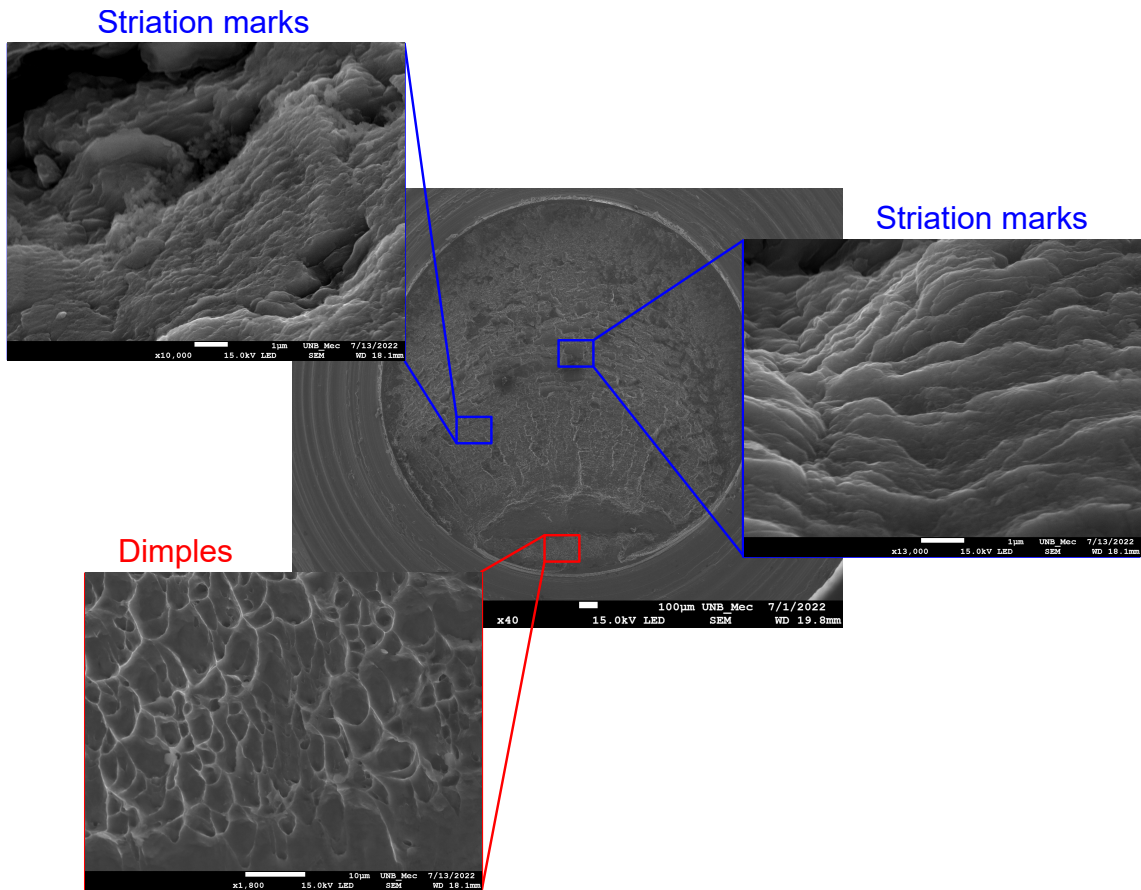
Microscopic features observed on the fracture surface of the V-notched wire specimen V17 (refer to Table 3.2).
